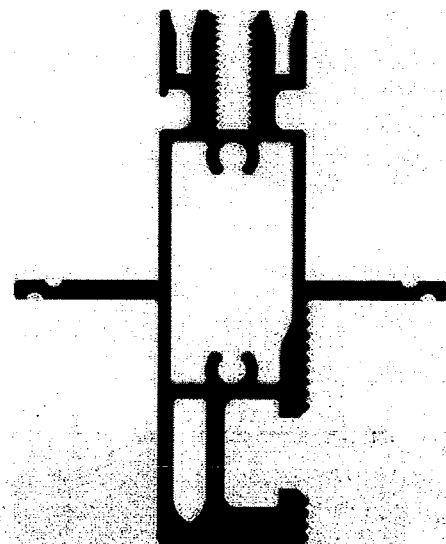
SunFrame threaded slot rail, cross section, actual size.
